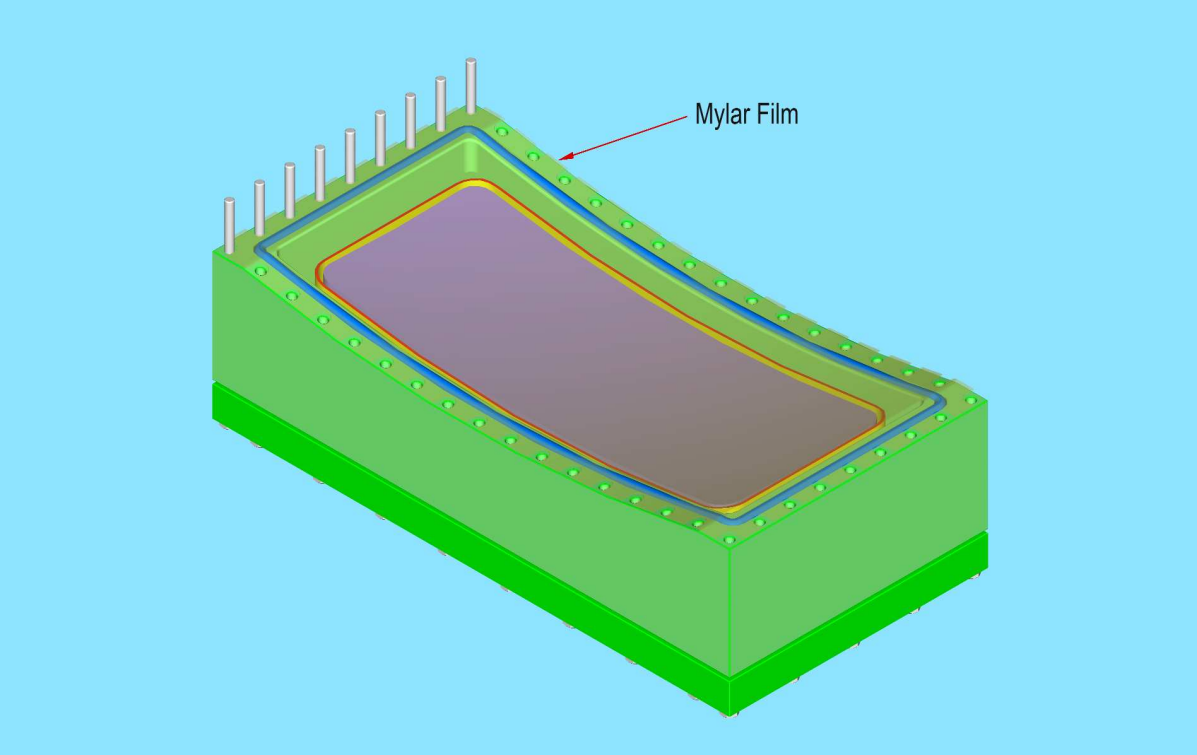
The vacuum chamber with the mold and the pre-cut Mylar film.
